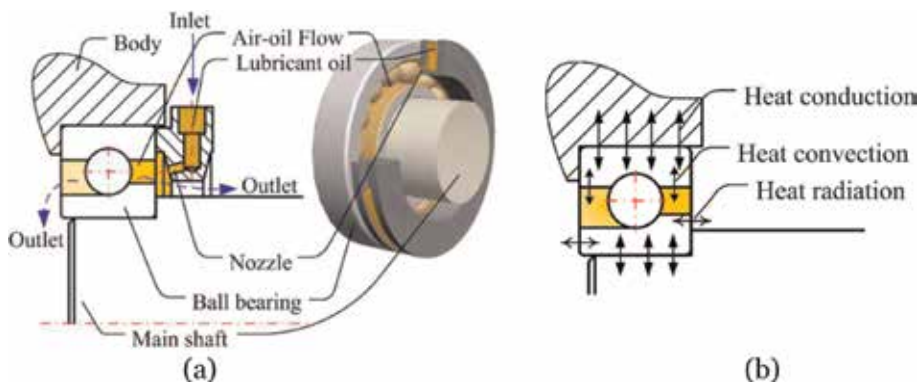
Configuration of the oil-jet cooling ball bearing and heat transfer method: (a) configuration of jet cooling mechanism and (b) heat dissipation methods.
